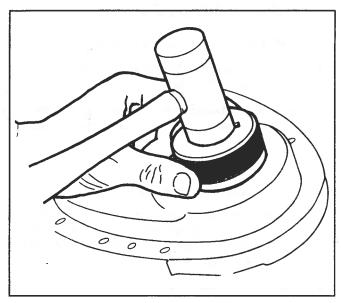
Installing Front-Cover Oil Seal With Cover Removed
